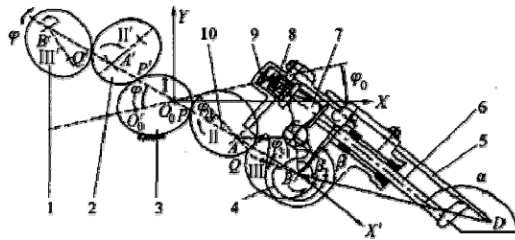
The sketch of transplanting mechanism with elliptical planetary gears
